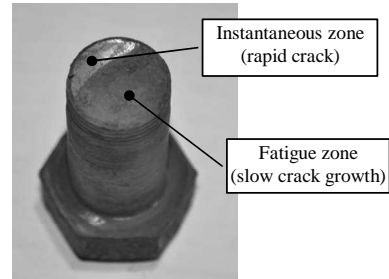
Fatigue crack: bolt  $\phi$  24mm.
